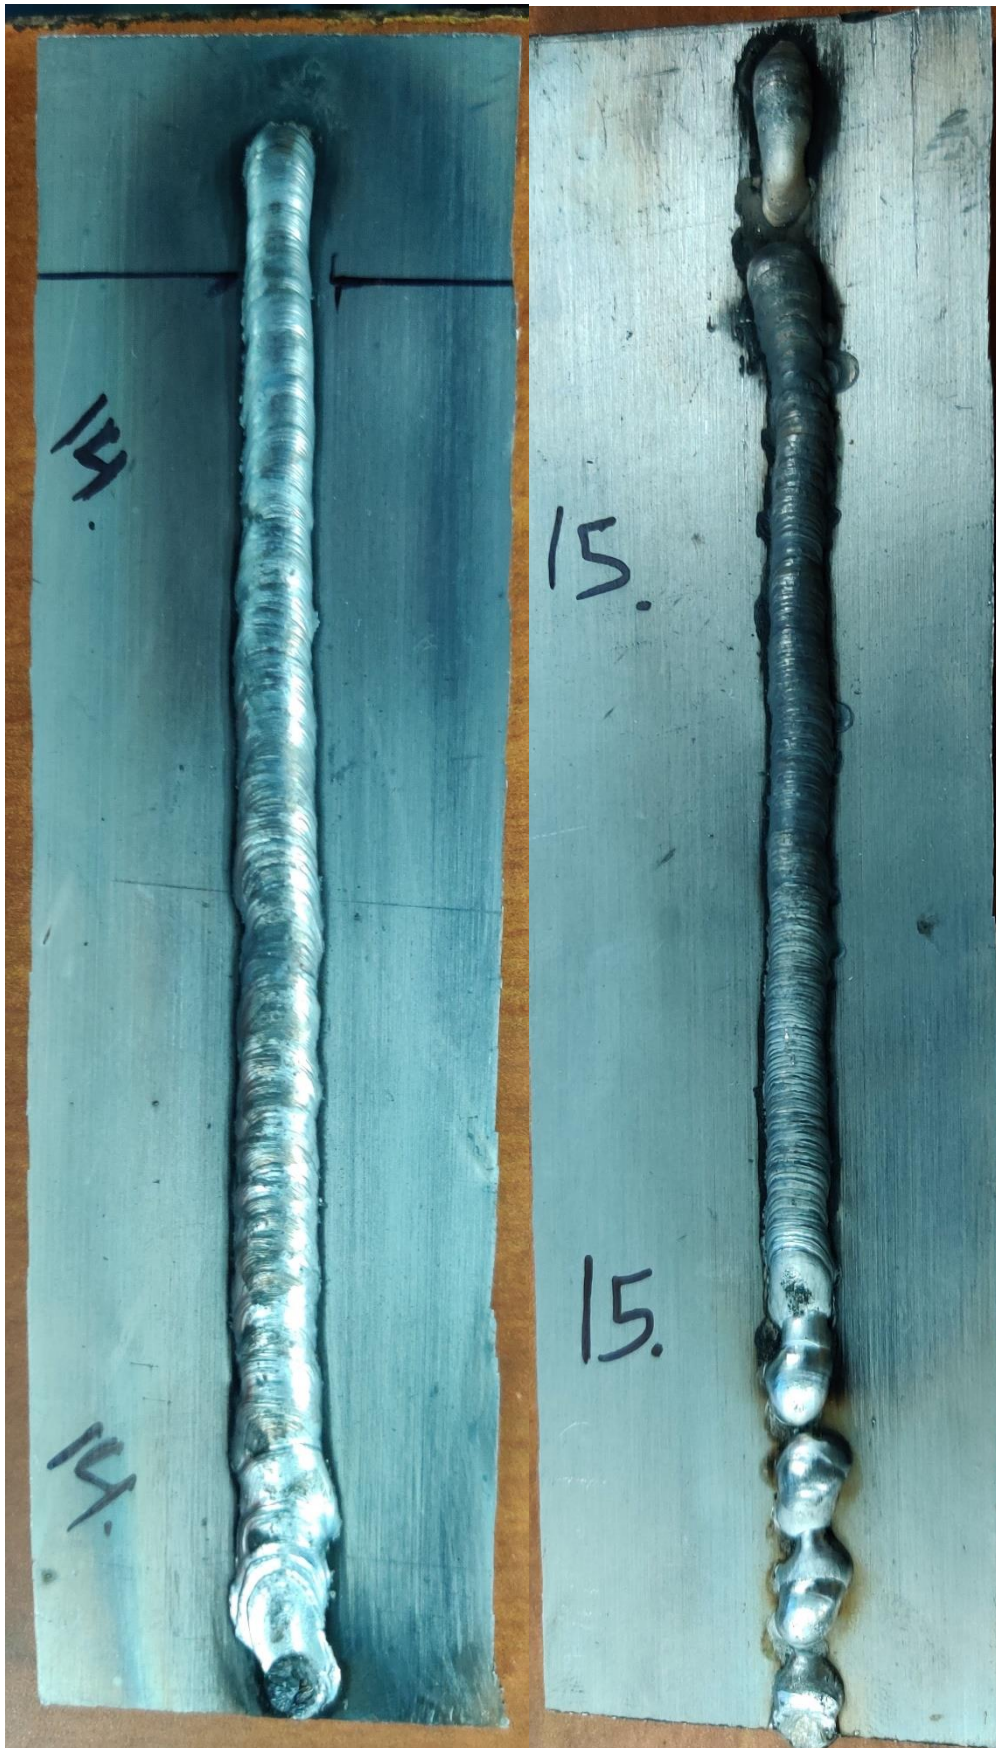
Weld bead obtained by run no. 14 & 15
